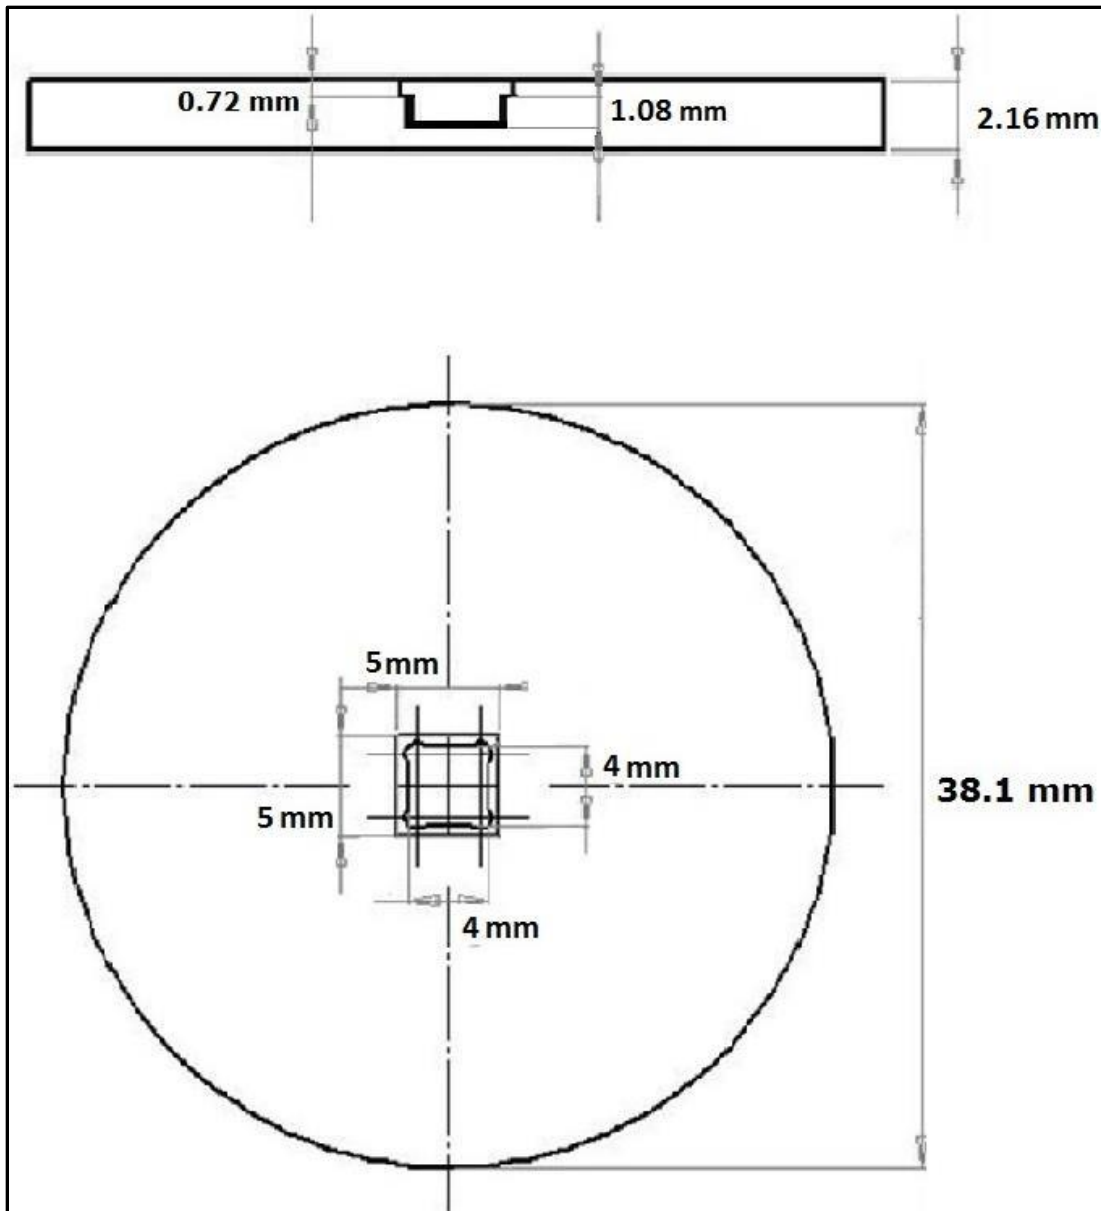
Dimensions of a 1.8 mm deep pocket holder [108]
